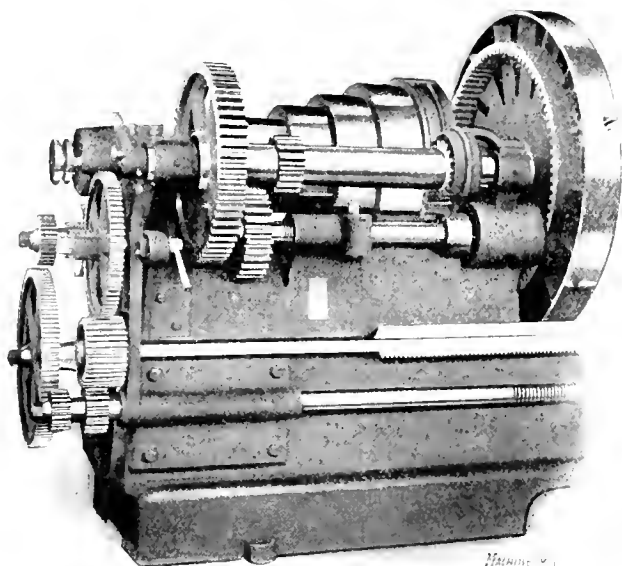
Driving and Feed Gearing of Fifield Lathe
